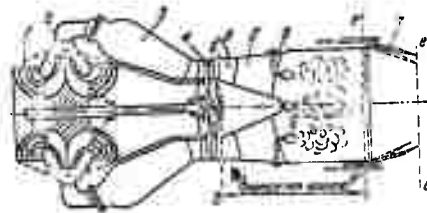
Diagrammatic layout of the afterburner type turbojet engine.
